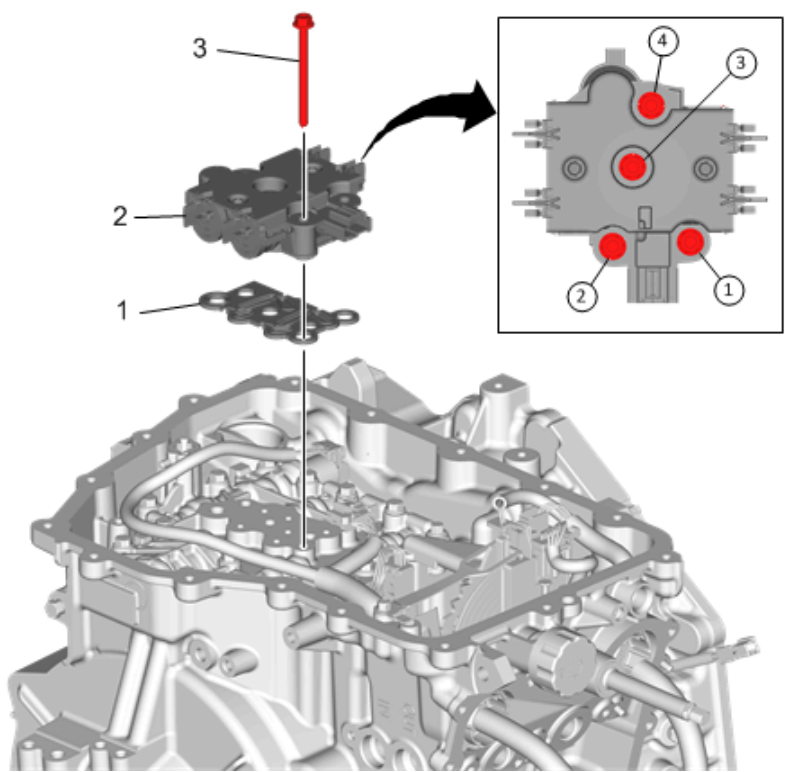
Control Solenoid Valve (With Bolt Tightening Sequence)
